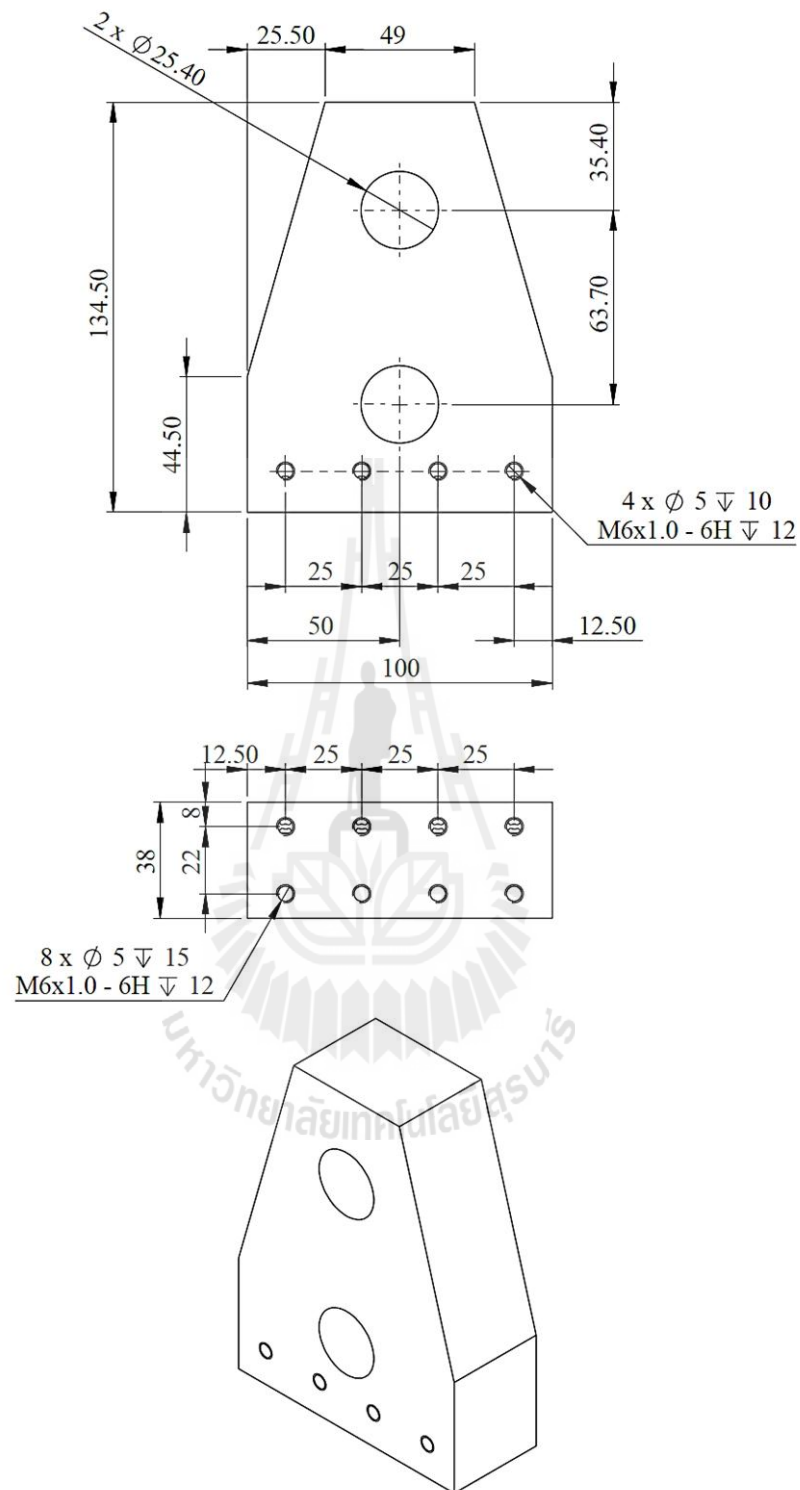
Dimensions of steel tower (cont.) in millimeter scale.
